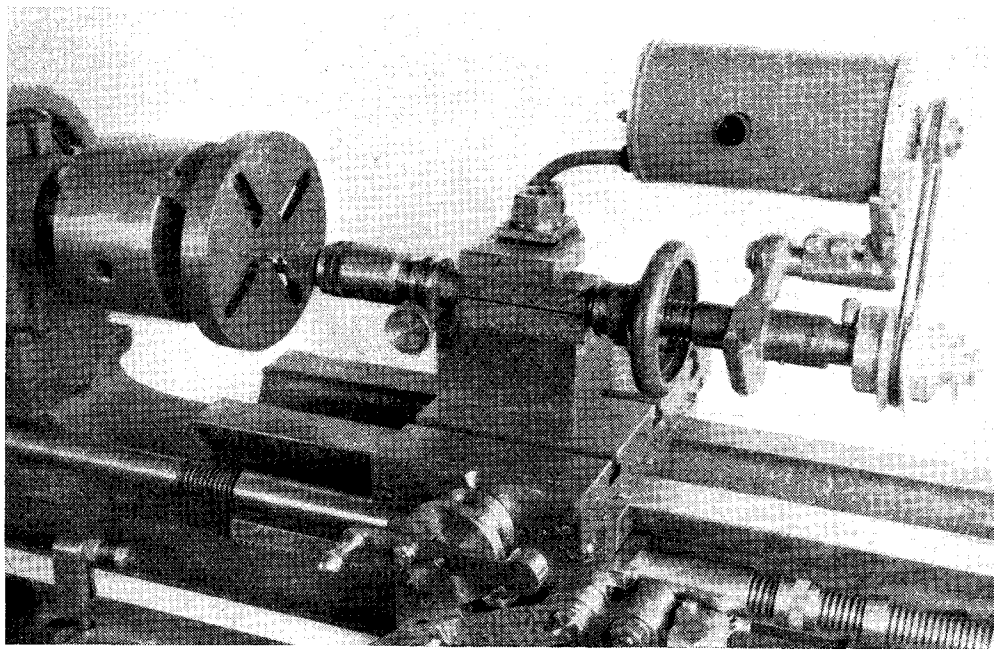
The motor-driven drilling spindle mounted on the cross-slide of a Drummond lathe
